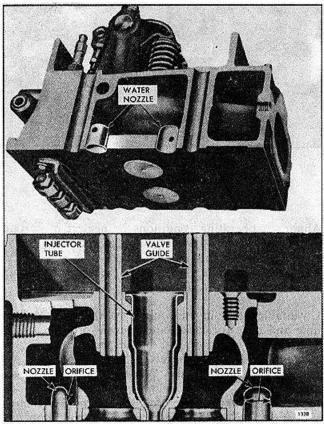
Water Nozzles in Two-Valve Cylinder Head
